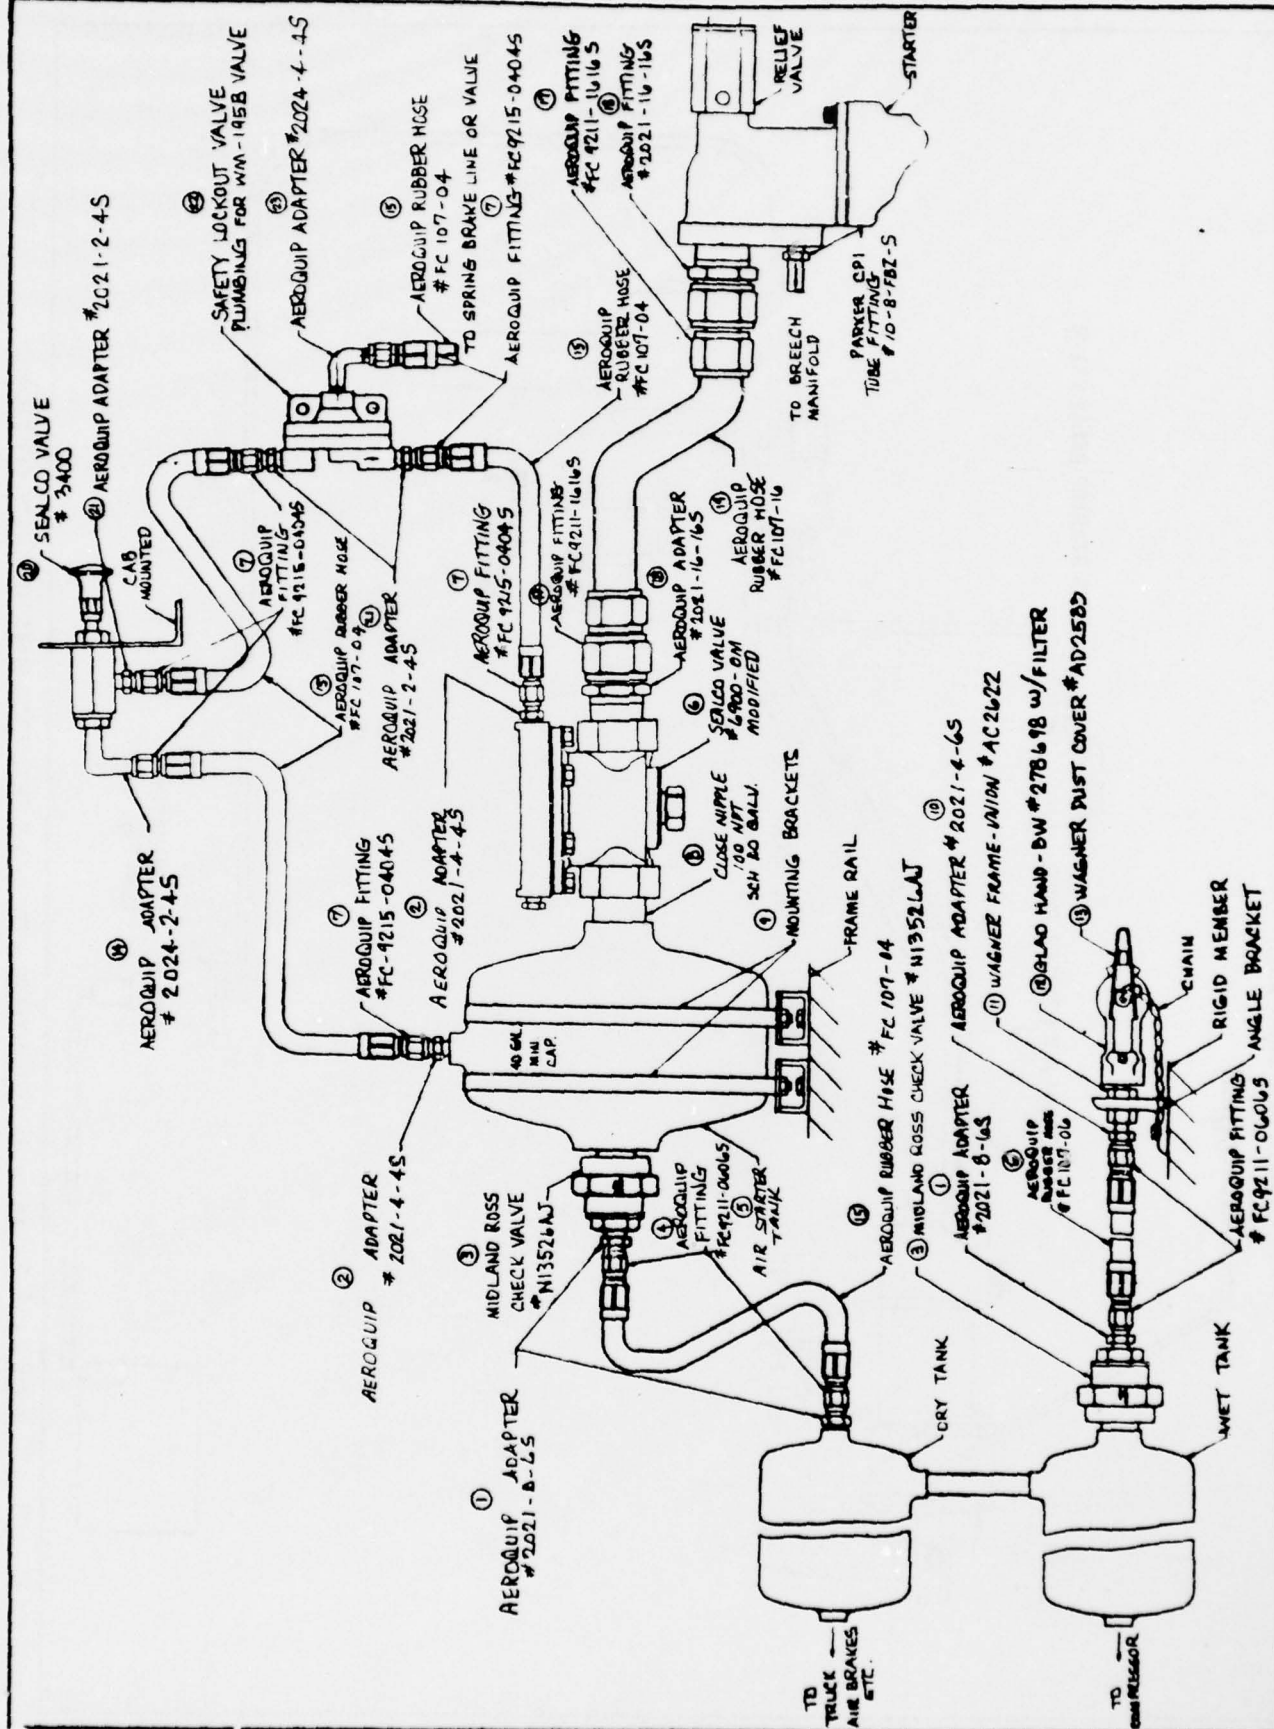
AIR COMPONENT PARTS ILLUSTRATION
